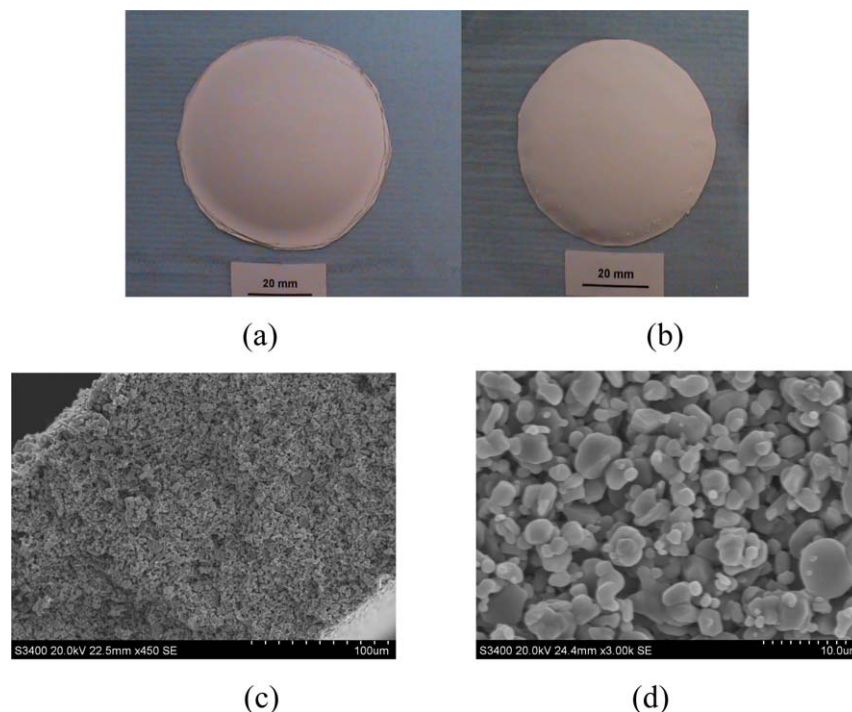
Vacuum formed and sintered domes (particle size: 4.2 μm): (a) vacuum formed dome; (b) sintered dome; (c) fracture surface (SEM); (d) sintered surface (higher magnification SEM).
